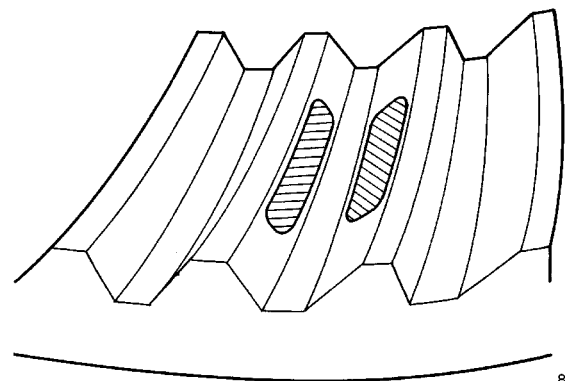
GEAR CONTACT PATTERN IS CORRECT
